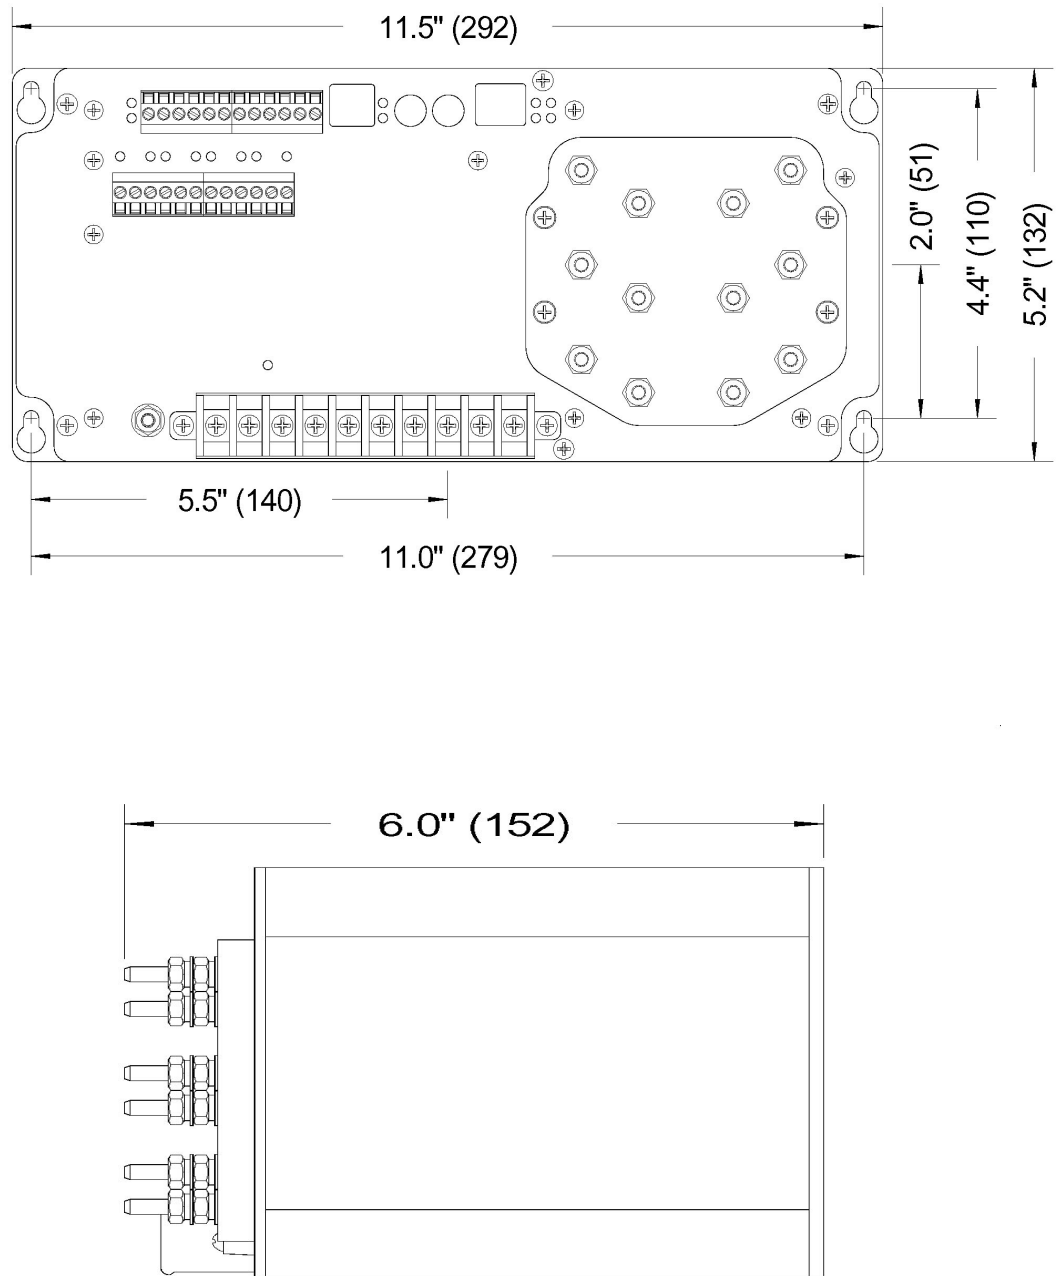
(continued) - Mounting and Overall Dimensions (M572/M571 100A version)
